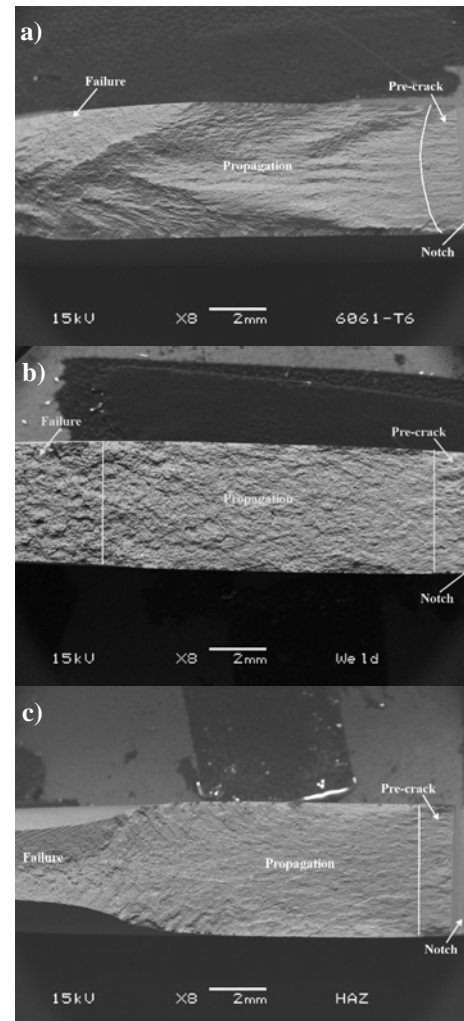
General view of surface fractures, a) base metal, b) weld metal and c) HAZ.
